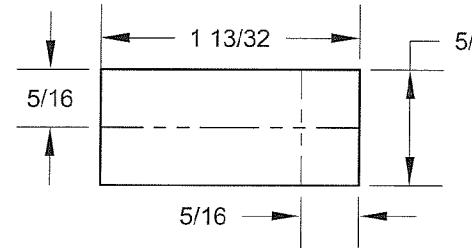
CUTTING AND MARKING THE W-1029E SPACER
